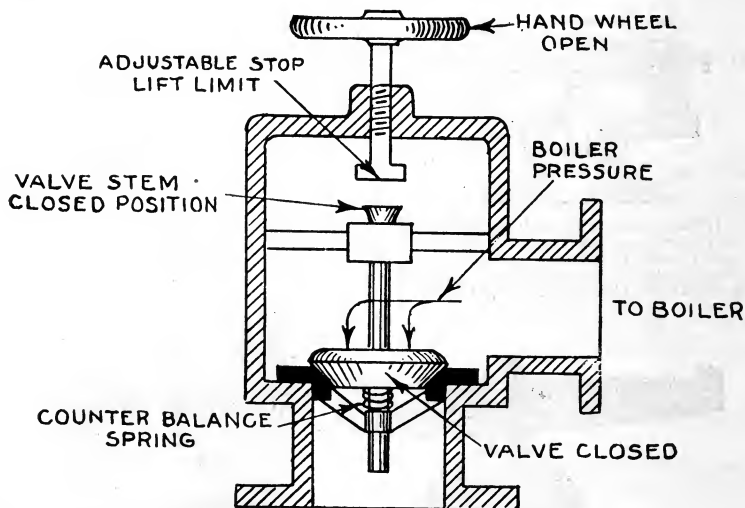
,716.—Stop or non-return valve. A form of check valve which can be opened or closed by hand control when the pressure in the boiler is *greater* than that in the line, but cannot be opened when the pressure *within* the boiler is *less* than that in the line. The counterbalance spring slightly overbalances, the weight of the valve and tends to hold the valve open, thus preventing movement of the valve with every slight fluctuation of pressure.
